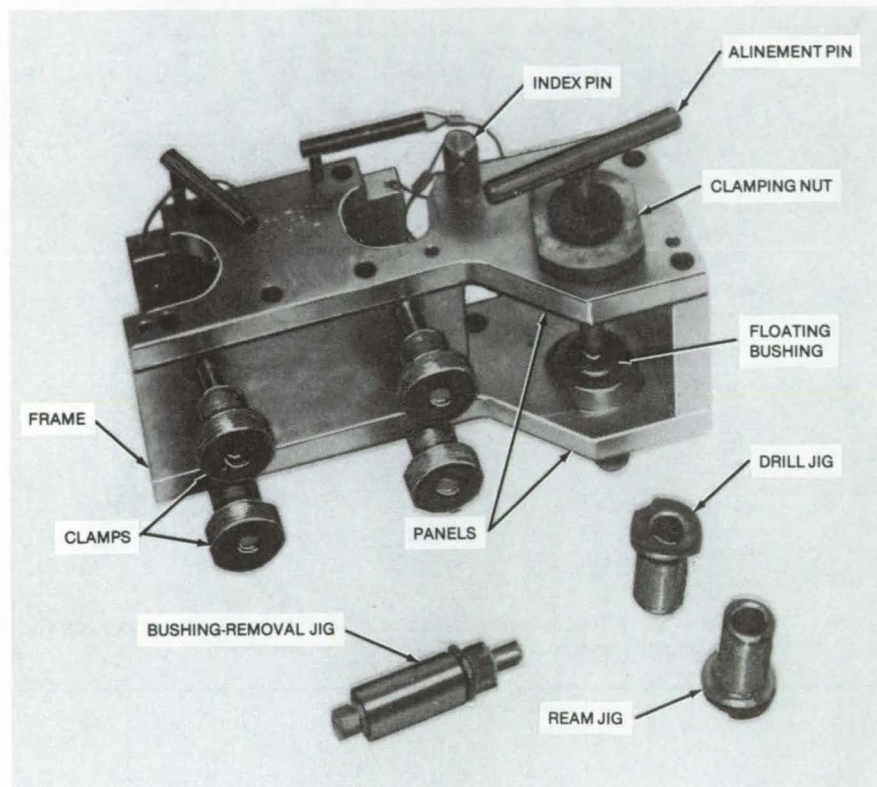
The Tool Set includes a boxlike frame fixture and accessories to maintain a centerline for drilling and reaming.
